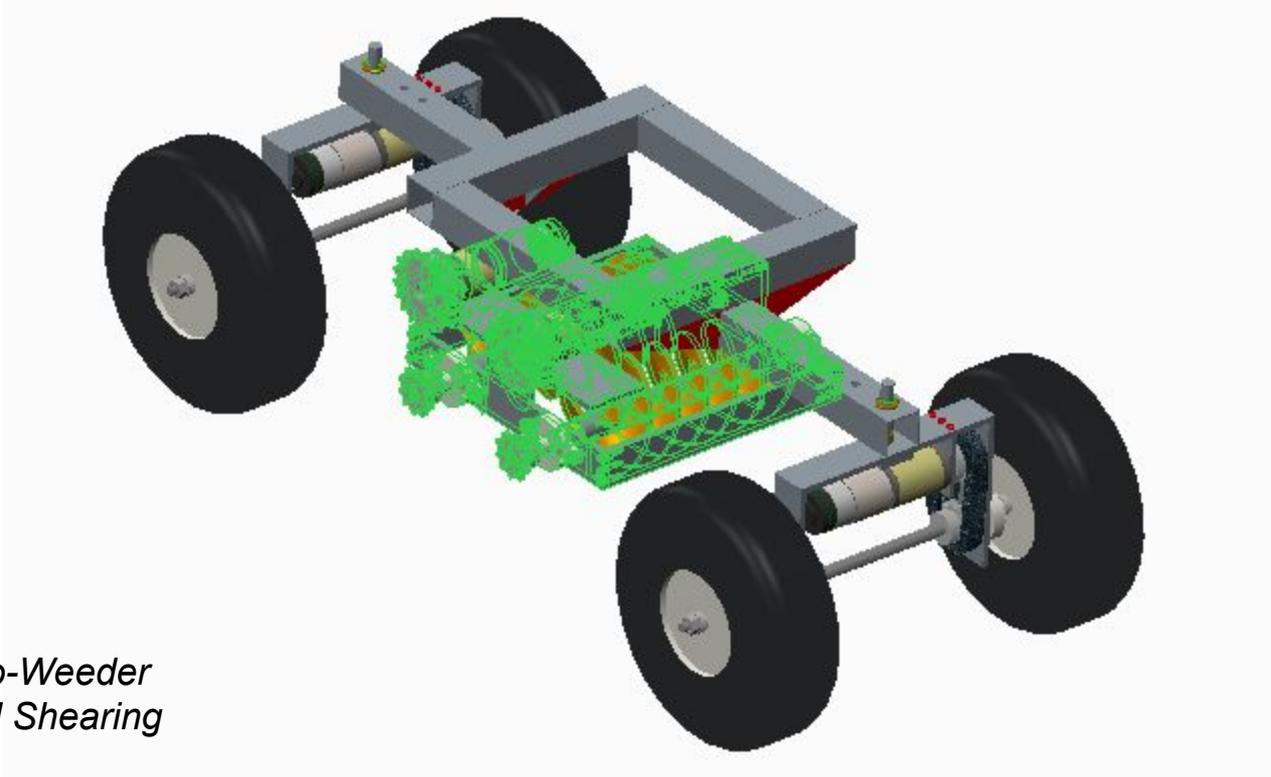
Robo-Weeder with Highlighted Shearing Mechanism.
